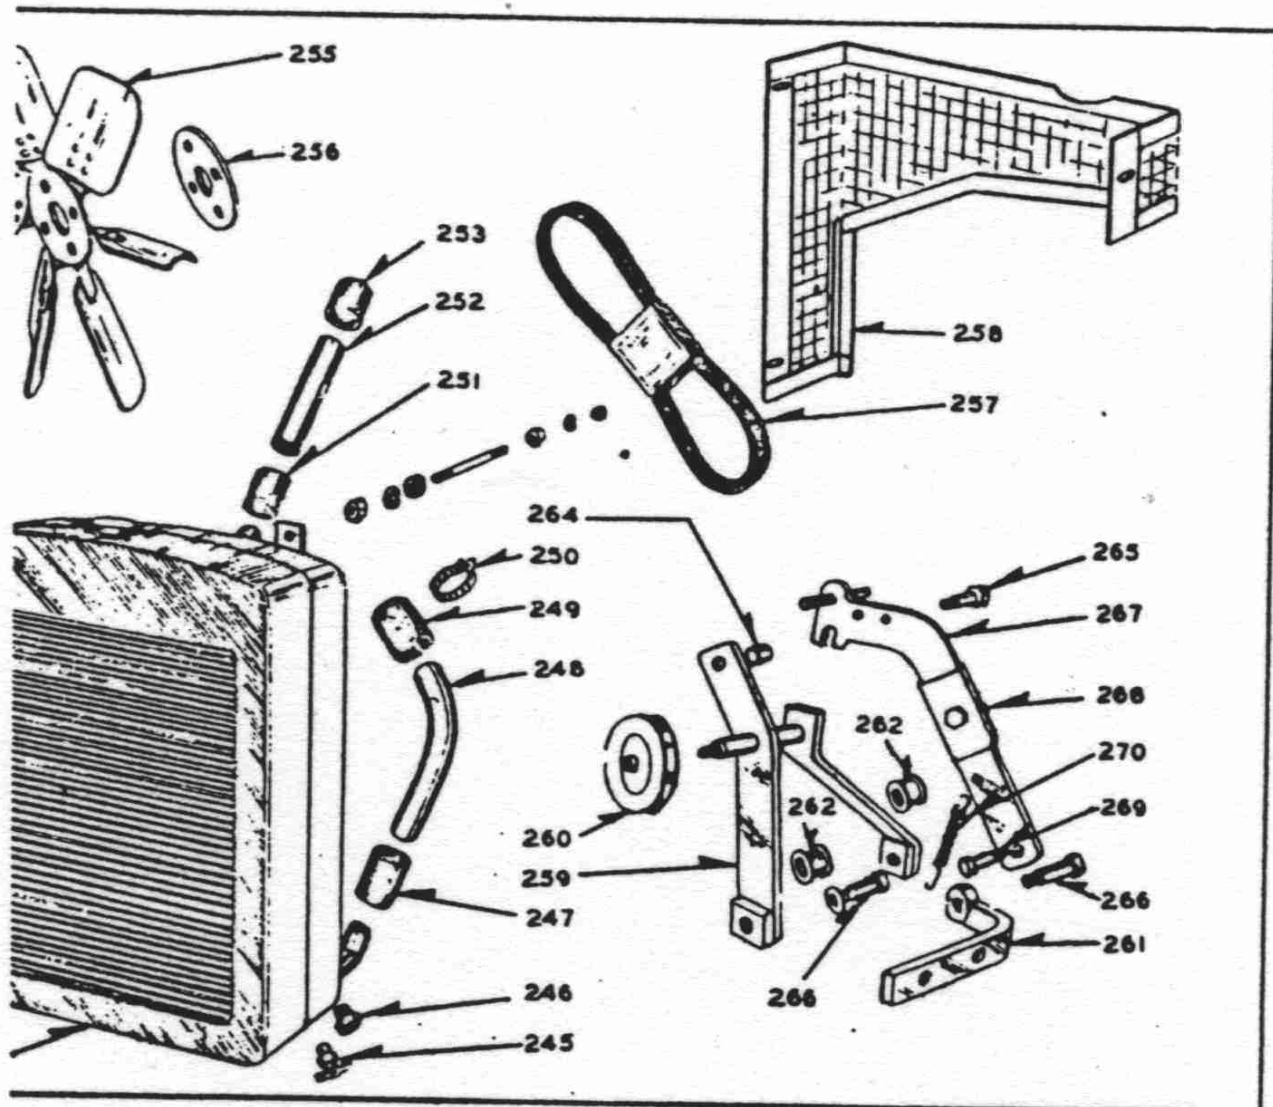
RADIATOR, FAN AND IDLER PULLEY GROUP
